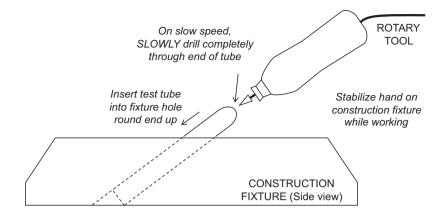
B1 Using construction jig to cut hole in the bottom of test tube.
